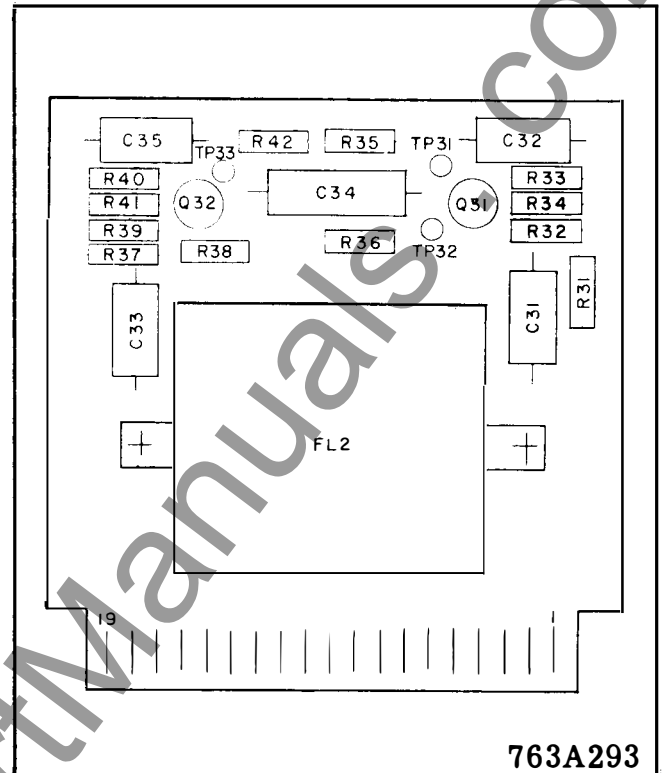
Component locations on the I.F. amplifier printed circuit board - germanium version.
